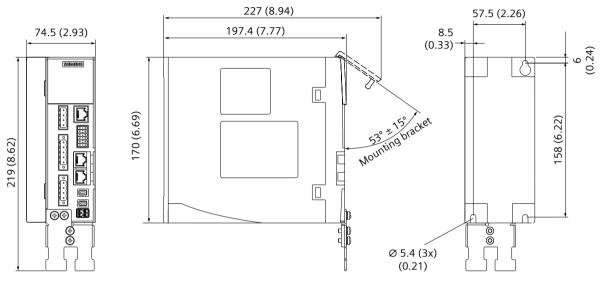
Dimension drawing SINAMICS S210 FSC, 1 AC, dimensions in mm (inch)
